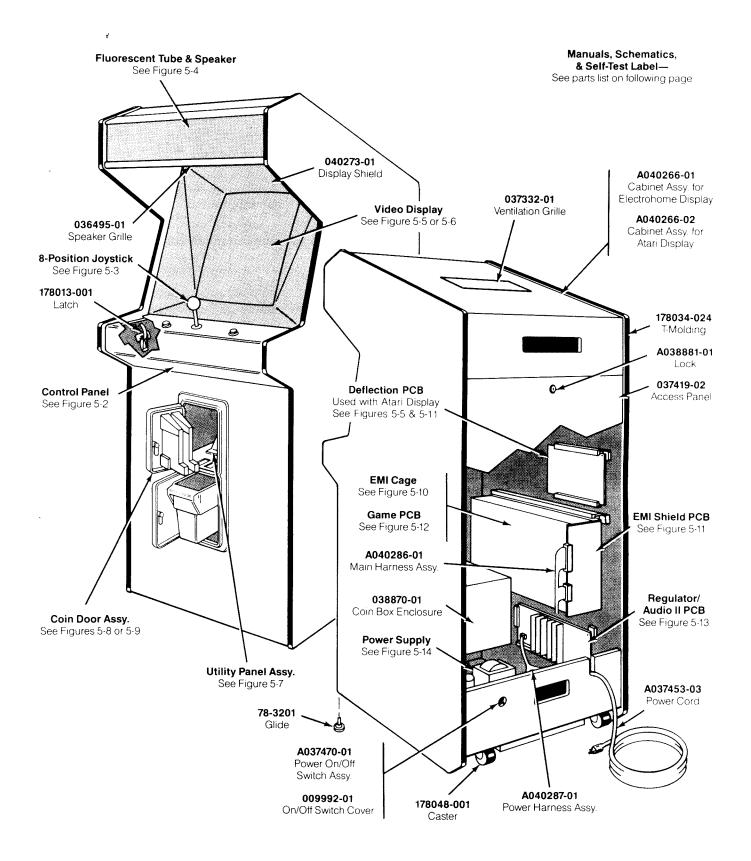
Cabinet Mounted Assemblies A040265-01 C
